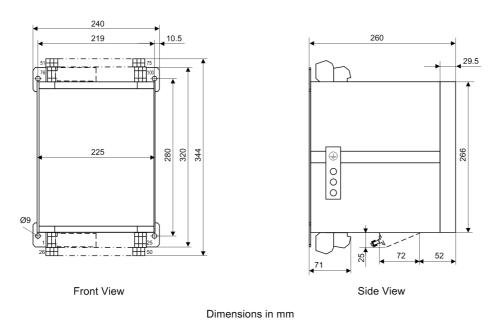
Dimensions of a 7UM621 for Panel Surface Mounting (housing size 1/2)
